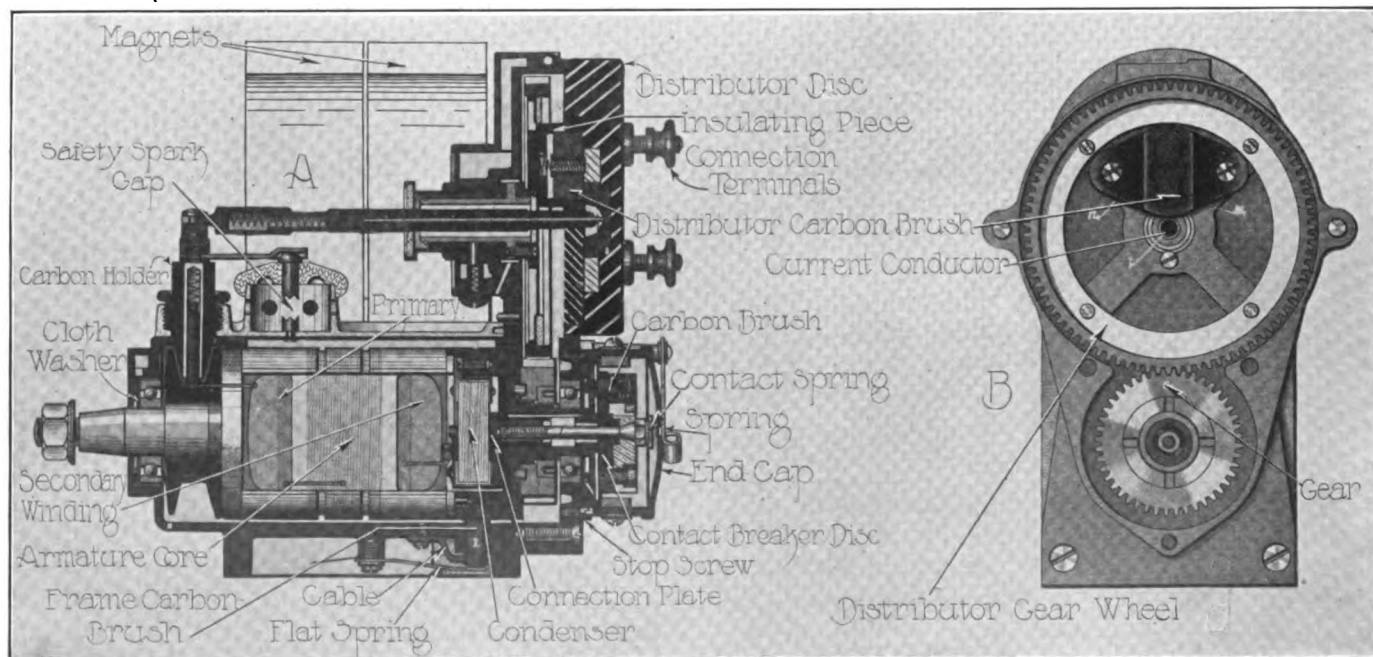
Sectional View of Bosch DU4 Magneto: A, Depicting the General Arrangement of the Components; B, Distributor End of the Instrument.
